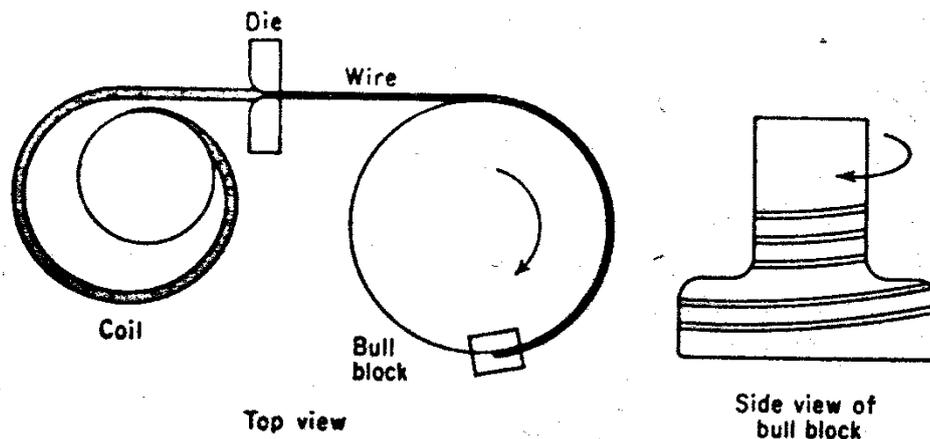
WIRE DRAWING EQUIPMENT
